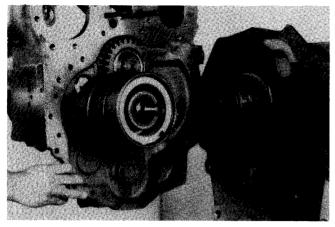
Separate the converter housing from the transmission housing. Remove gasket. NOTE: Forward and 2nd clutch will remain in converter housing.
